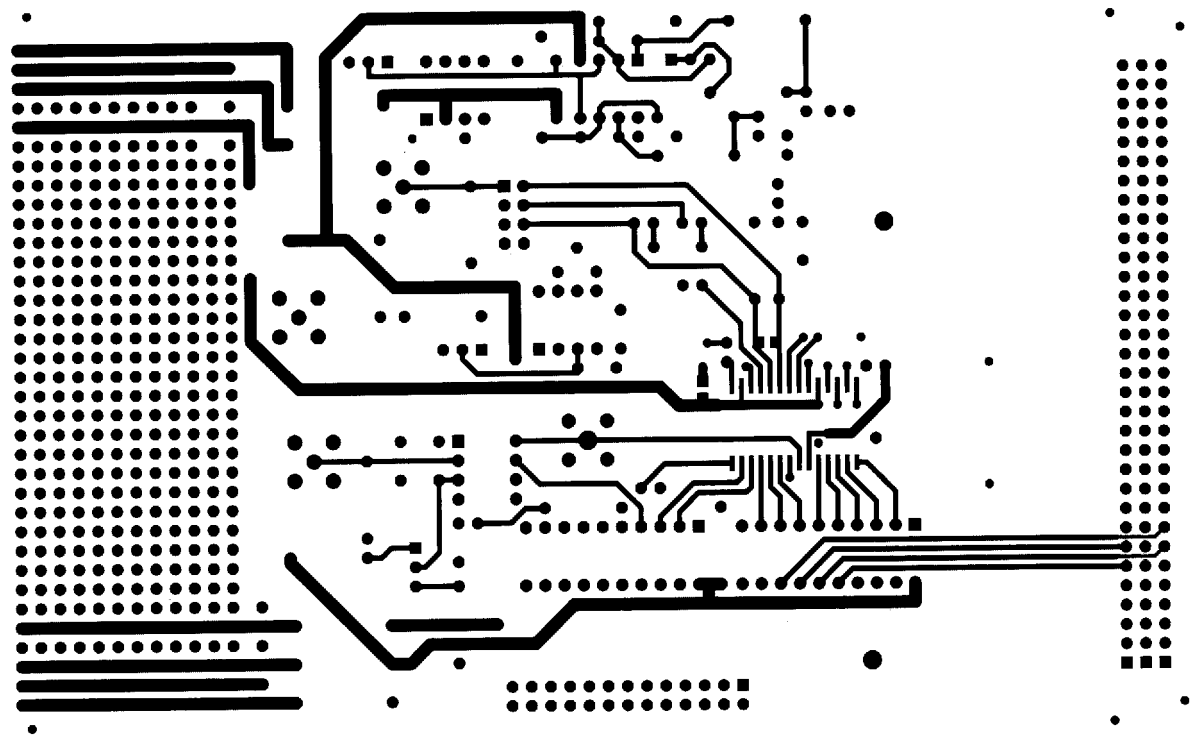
HI5703EVAL EVALUATION BOARD COMPONENT SIDE
